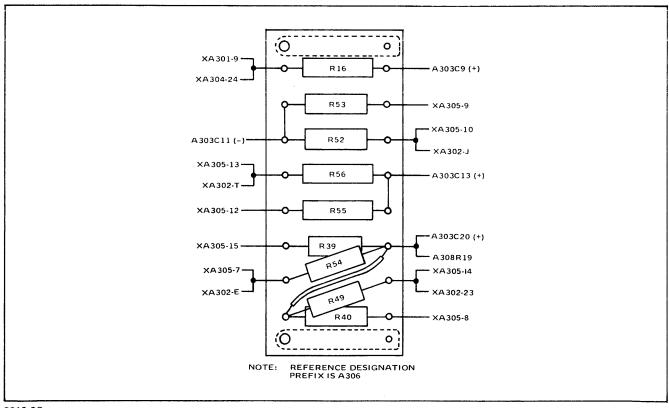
A306 Component Board Assembly, Parts Location and Connection Diagram
